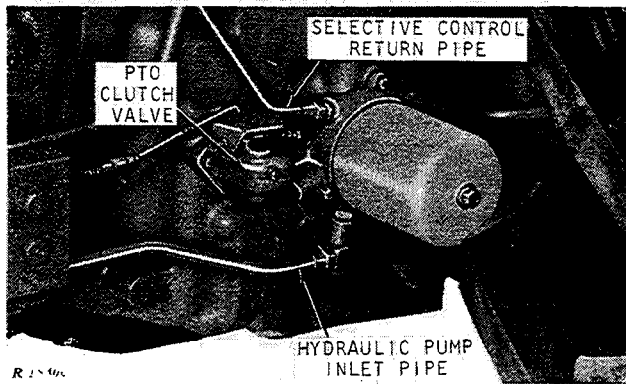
PTO Clutch Valve and Hydraulic Pipes
